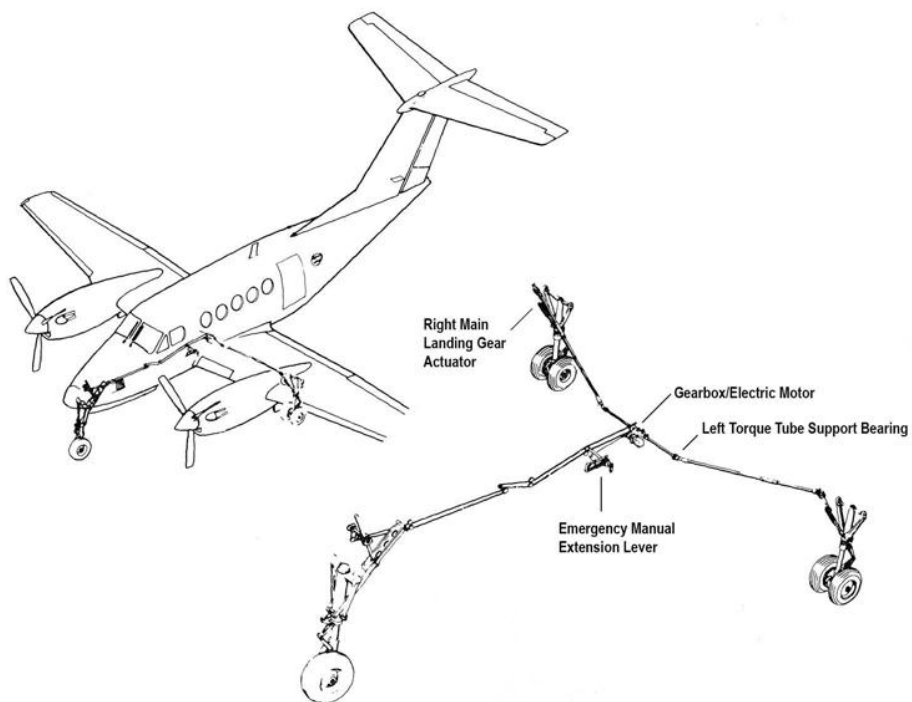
The mechanical landing gear system of the Super King Air 200 B200.
